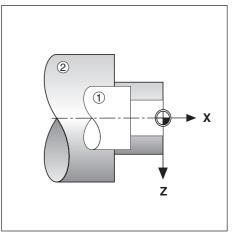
① Original workpiece ② After enlargement with scaling factor
